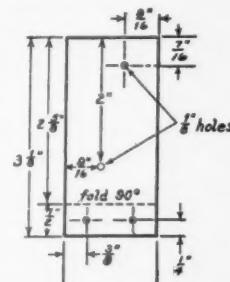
Dimensions of the angle bracket used to support the rear of the four-section bandswitch.
